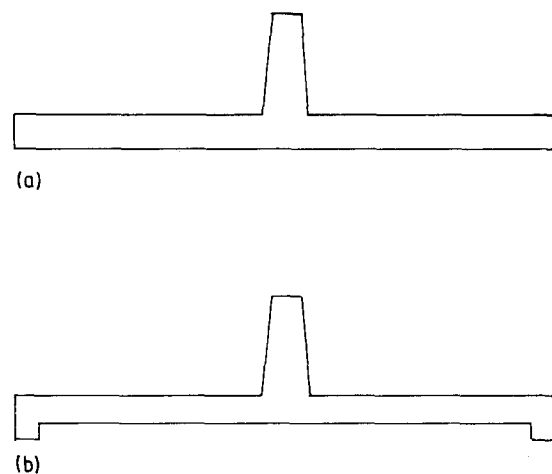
The injection-moulded discs in section: (a) 7 mm thick, 110 mm diameter, (b) 6 mm thick, 110 mm diameter.
